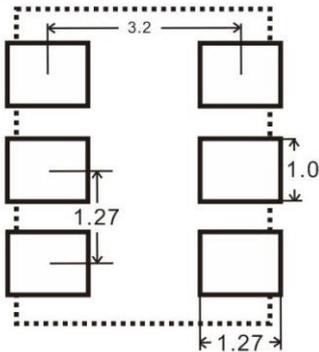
recommends the AHT10 PCB design dimensions (unit: mm), peripheral The dotted line is the outer dimensions of the SMD package.
